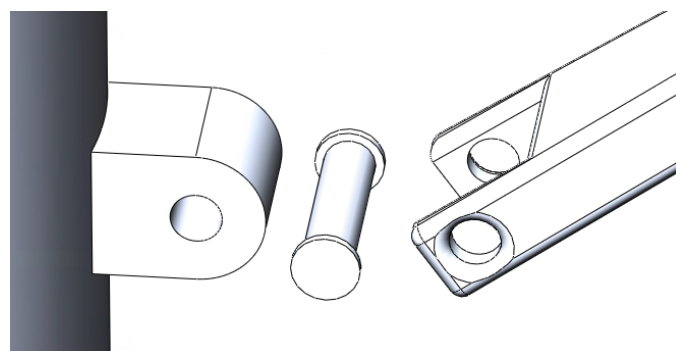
Close up view of the 3D modeled components joining the mast and turbine blade
